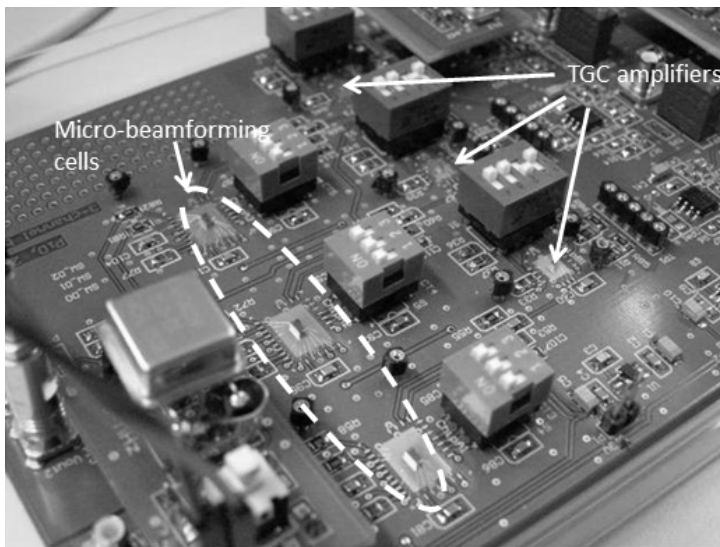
Photograph of the PCB (prototype ICs are assembled using chip-to-PCB bonding).
